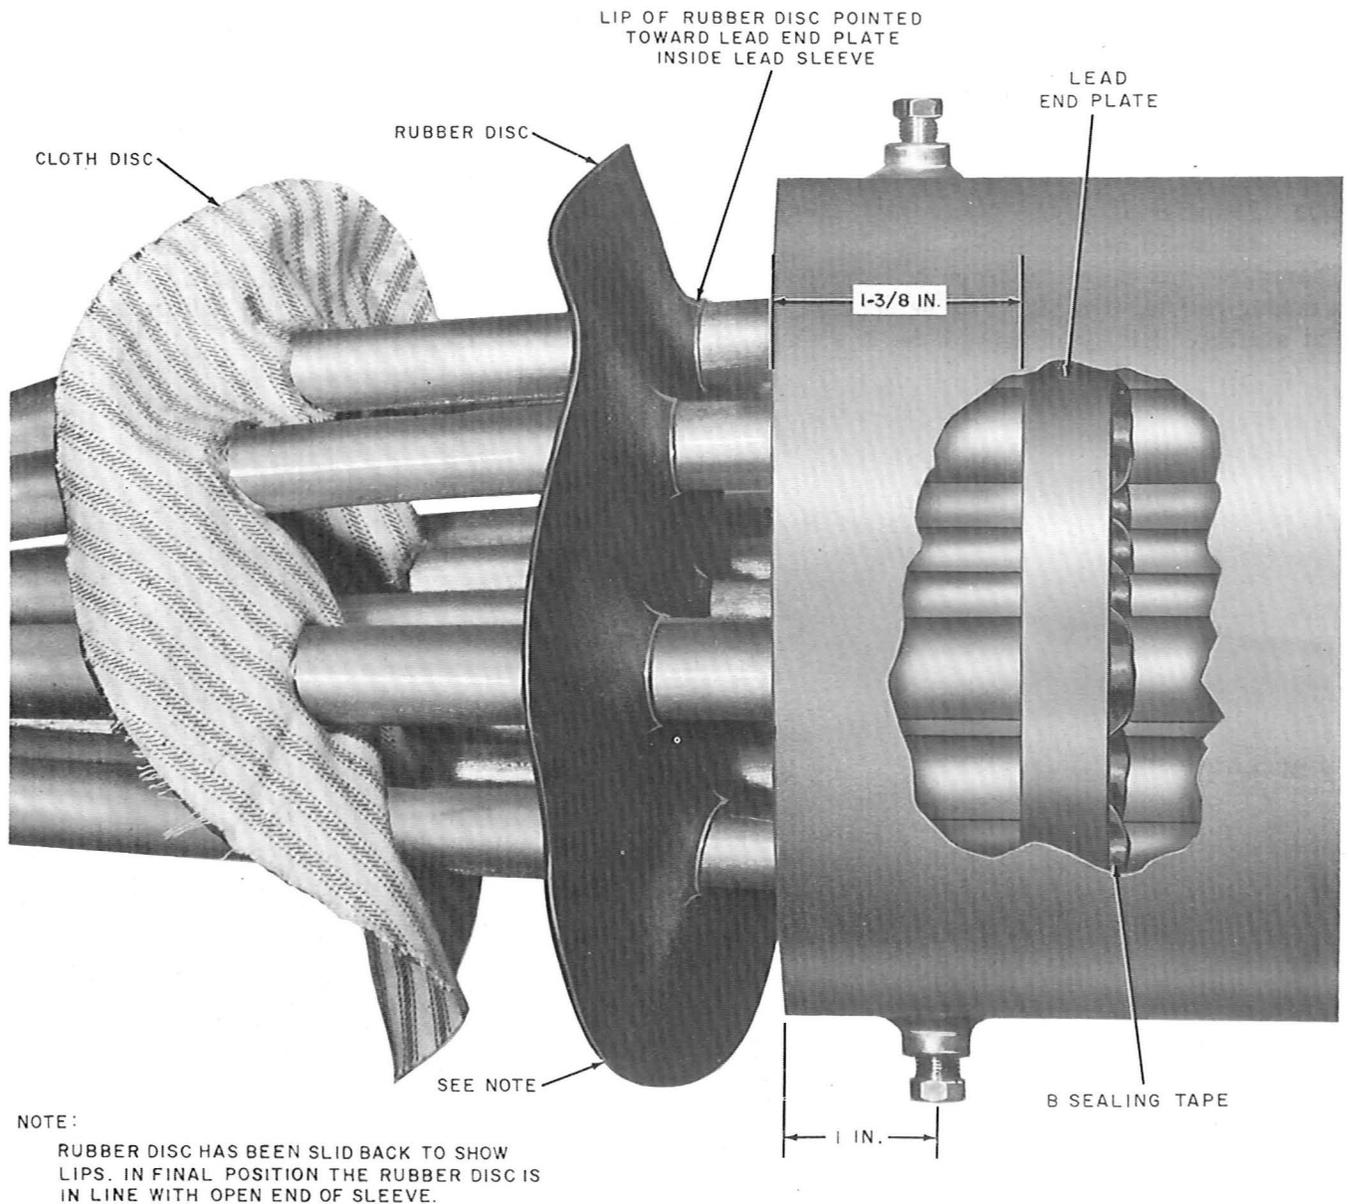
Lip of Rubber Disc Pointed Toward Lead End Plate
